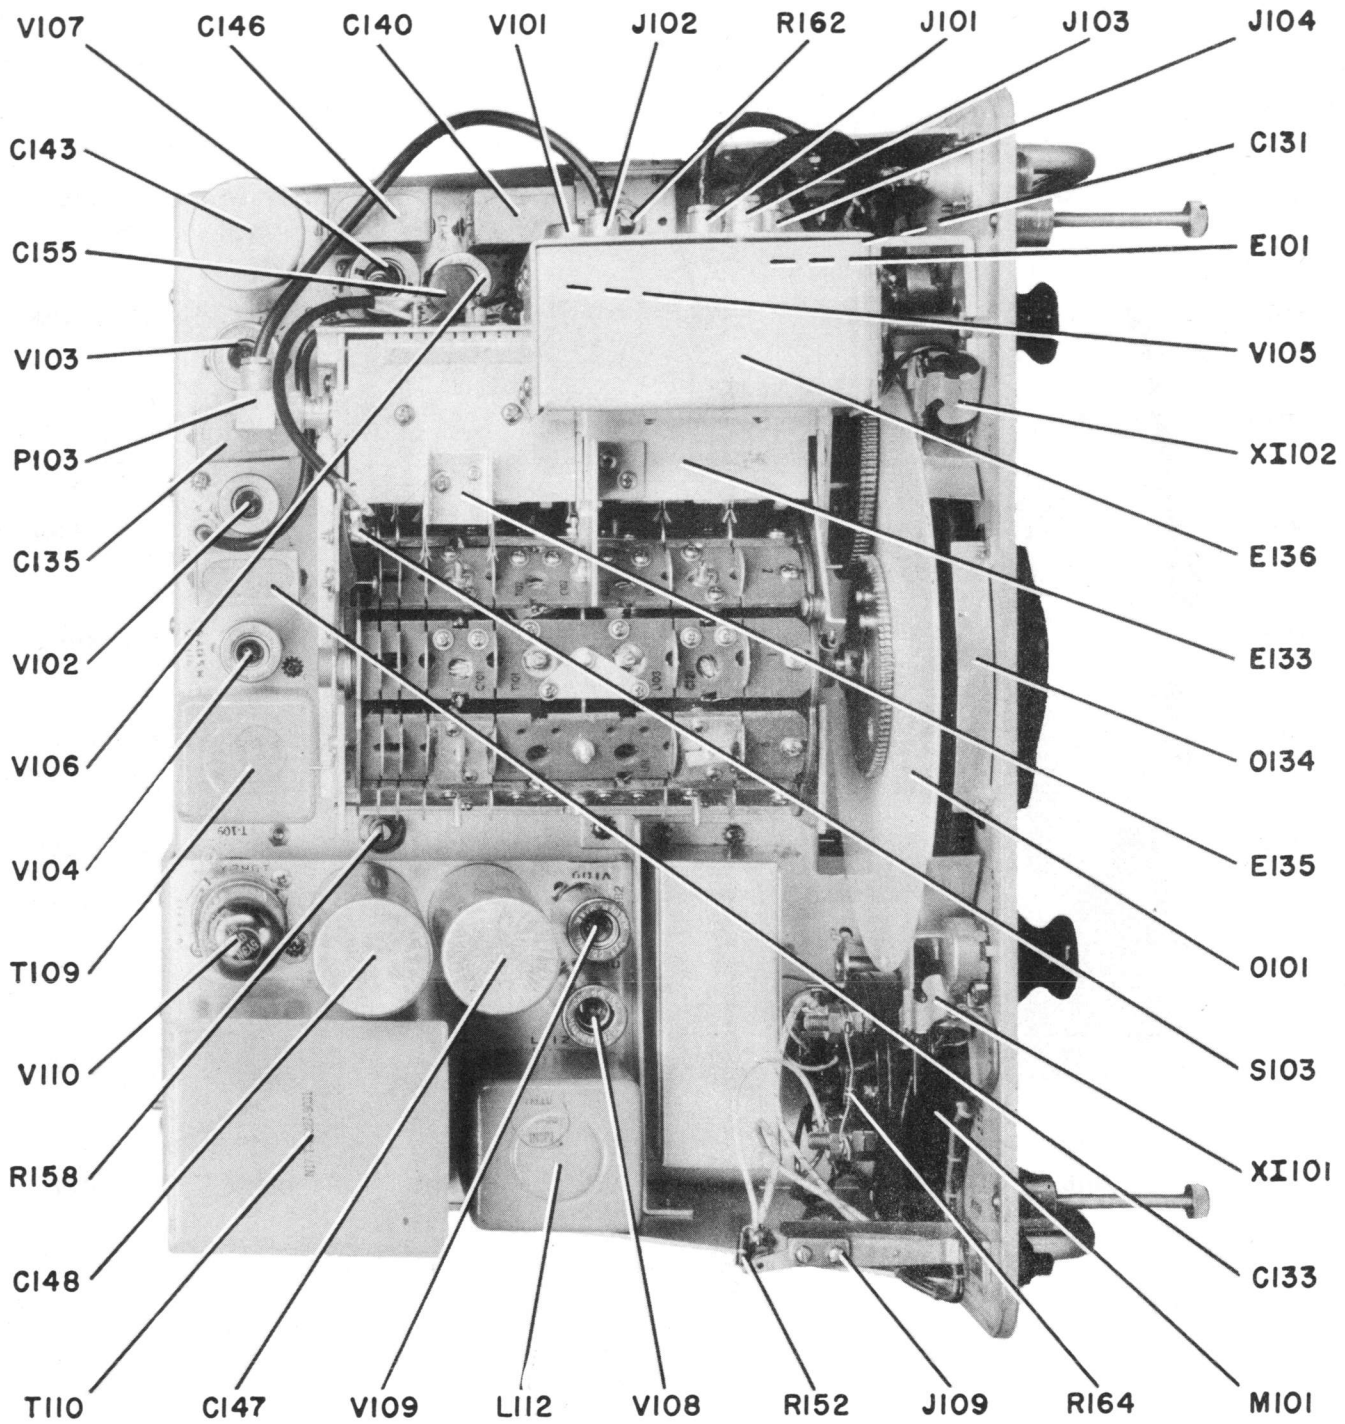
Component Locations, Top View of Chassis, Field Strength Meter IM-84/URM-50
